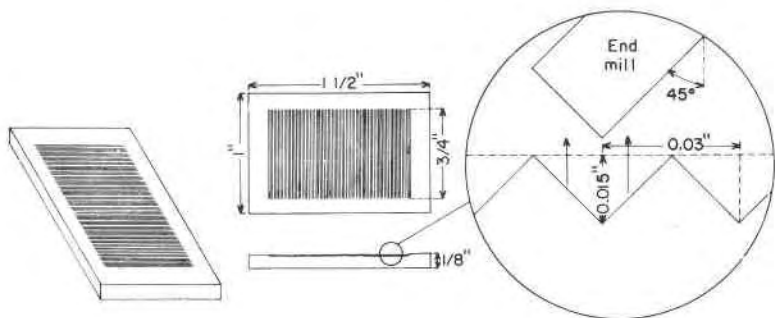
Sketch of the grooved plate. Enlargement at right shows position of end mill for cutting grooves.
